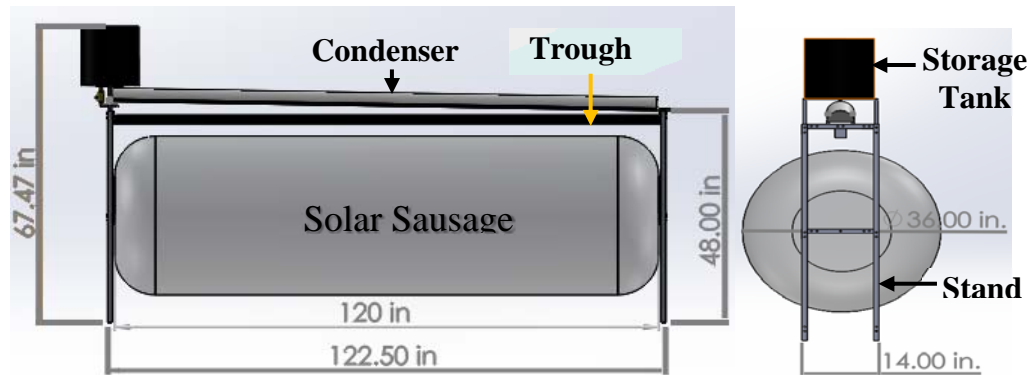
Master Assembly of the Desalination System showing crucial components and dimensions. Left, side view of the system. Right, cross-sectional view of the system.
